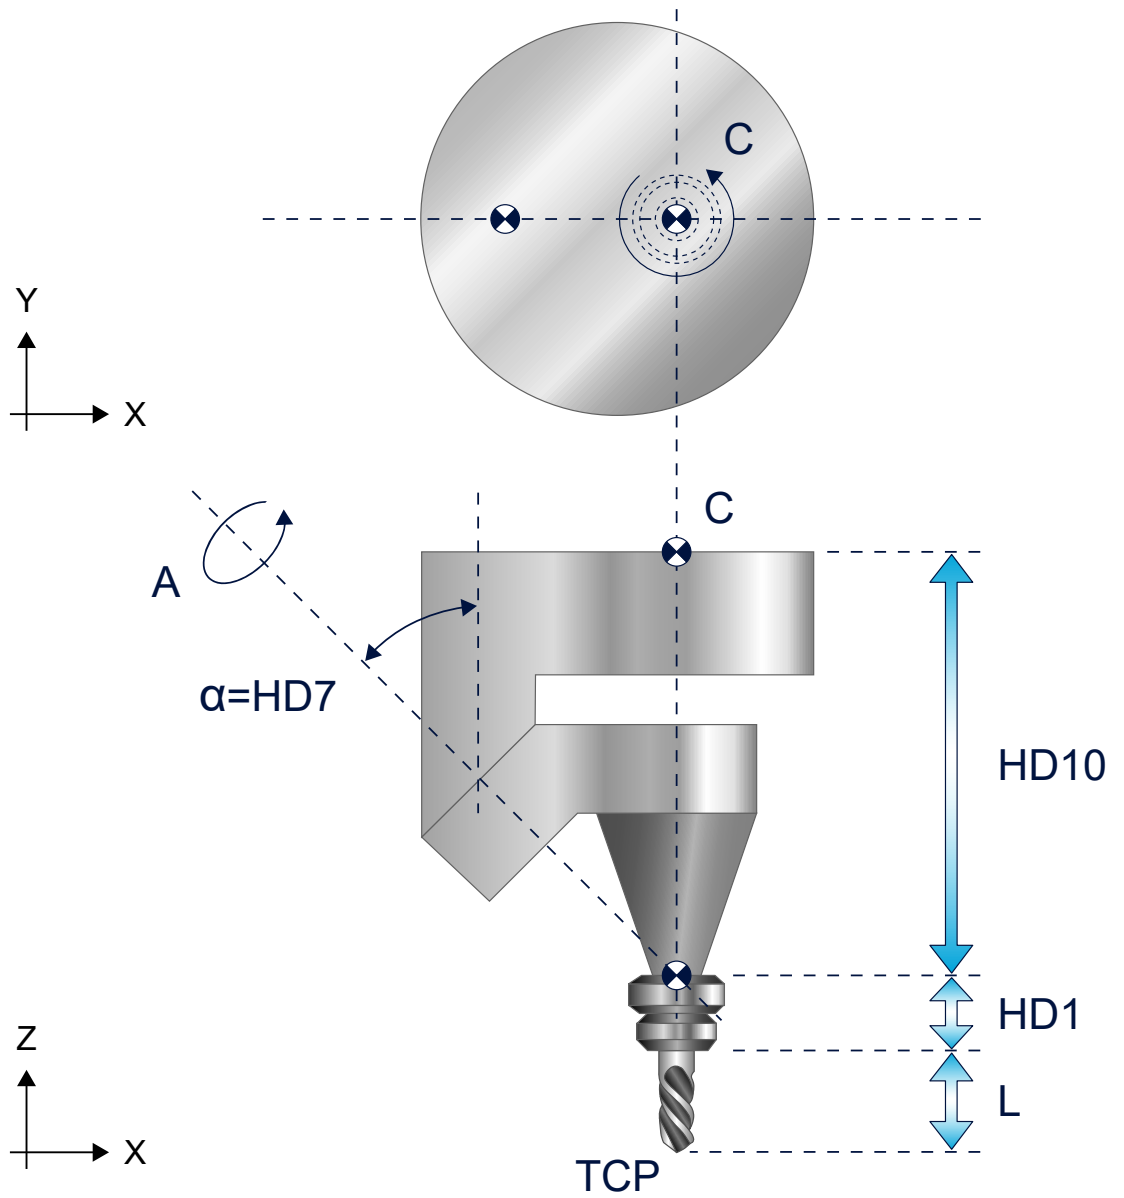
Cardanic head with ideal head geometry (intersection of C-A axis is located in tool axis)
